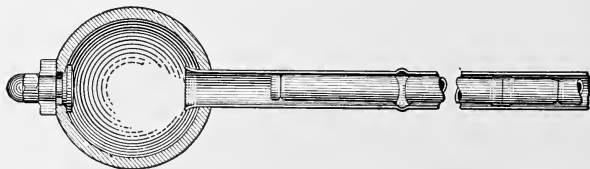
Section Through Superheater Header and Tubes showing Method of Holding Core in Place: Babcock & Wilcox Superheater as Applied to Stirling Boiler.
